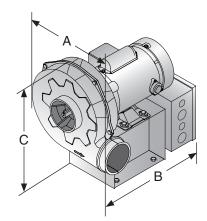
• Vacuum Pump Dimensions (see chart 2.3)
